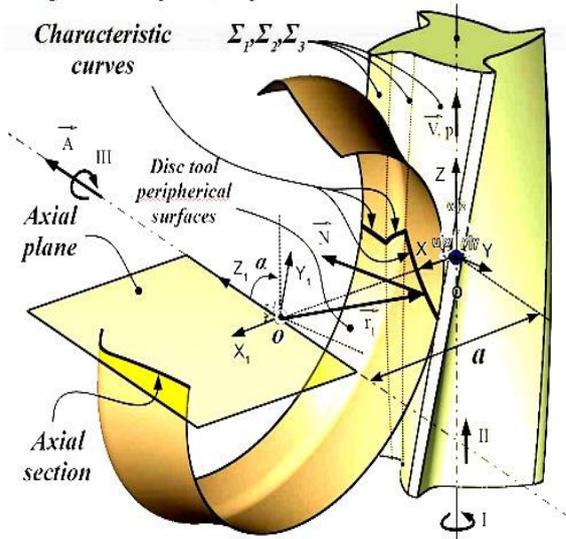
Disc-tool primary peripheral surface and helical surface to be generated [2]
